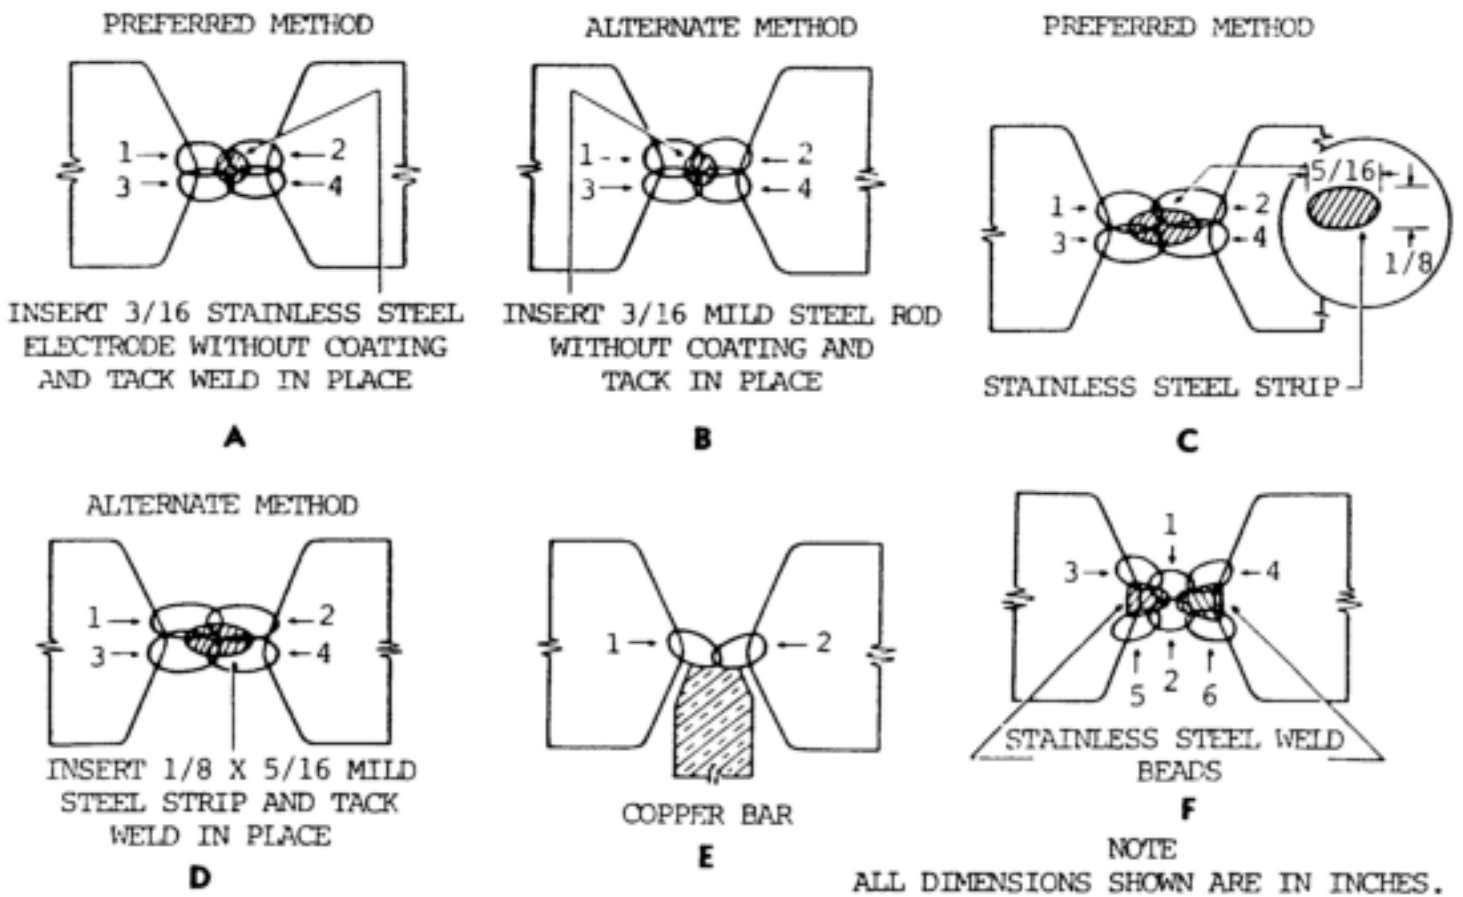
Backing methods for depositing weld beads at the root of a double V joint.
